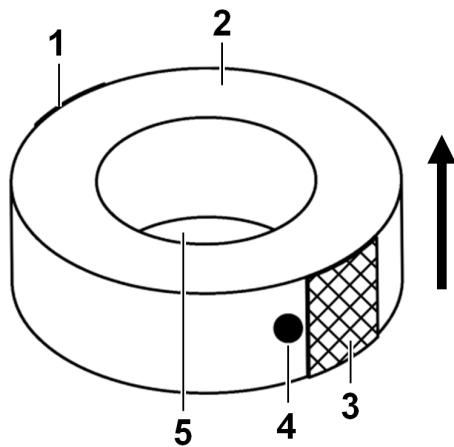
PDxxx: Exemplary product view of a model with inner hole
